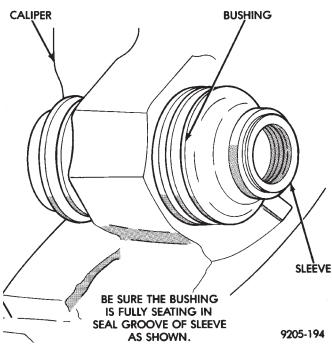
Correctly Installed Guide Pin Sleeve And Bushing
